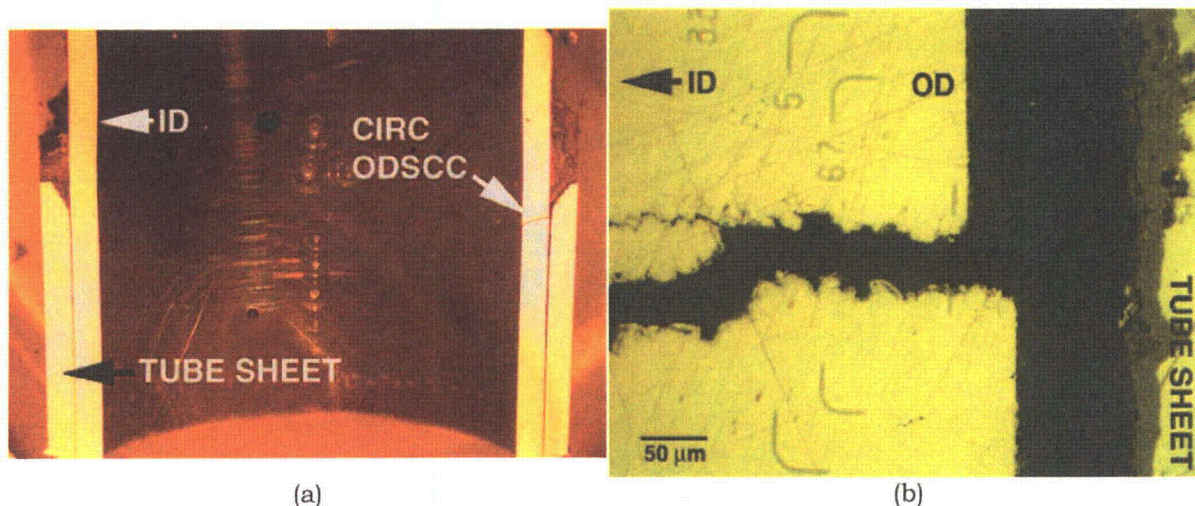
A throughwall circumferential ODSCC with crack branching in specimen No. 9 just below the top of the tube sheet. The crack opening is about 0.04 mm.
